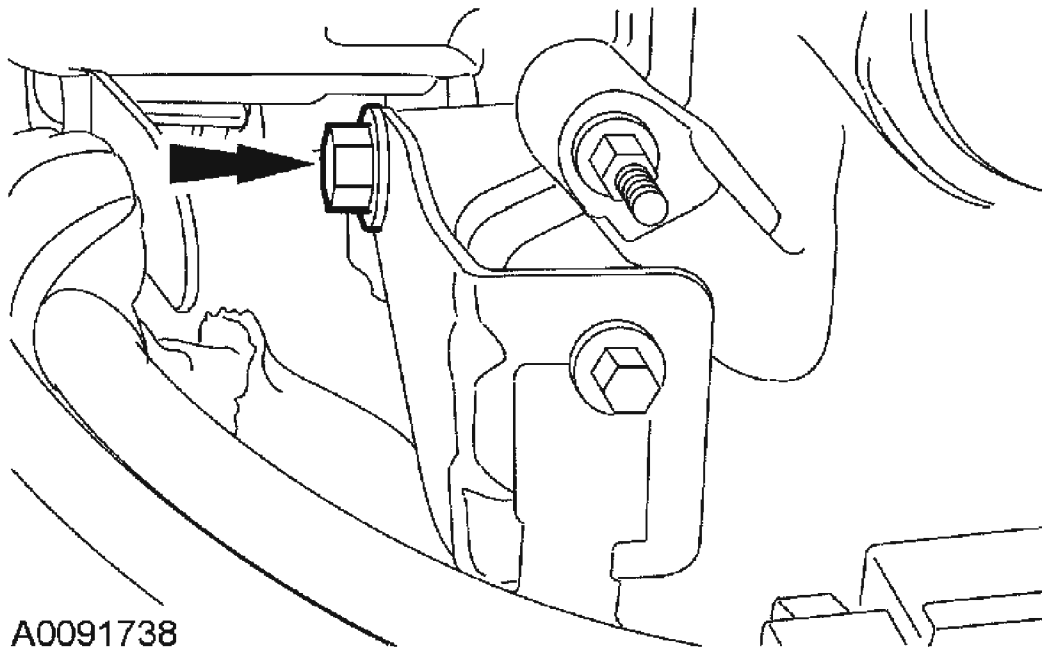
Removing Radio Interference Capacitor Bracket Bolt
